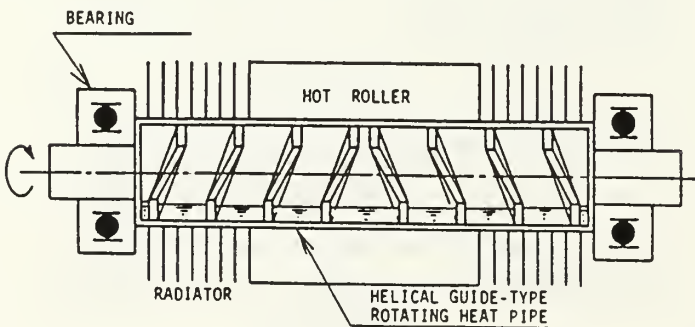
An application of the helical guide-type rotating heat pipe to cooling hot roller rotating at low speed
